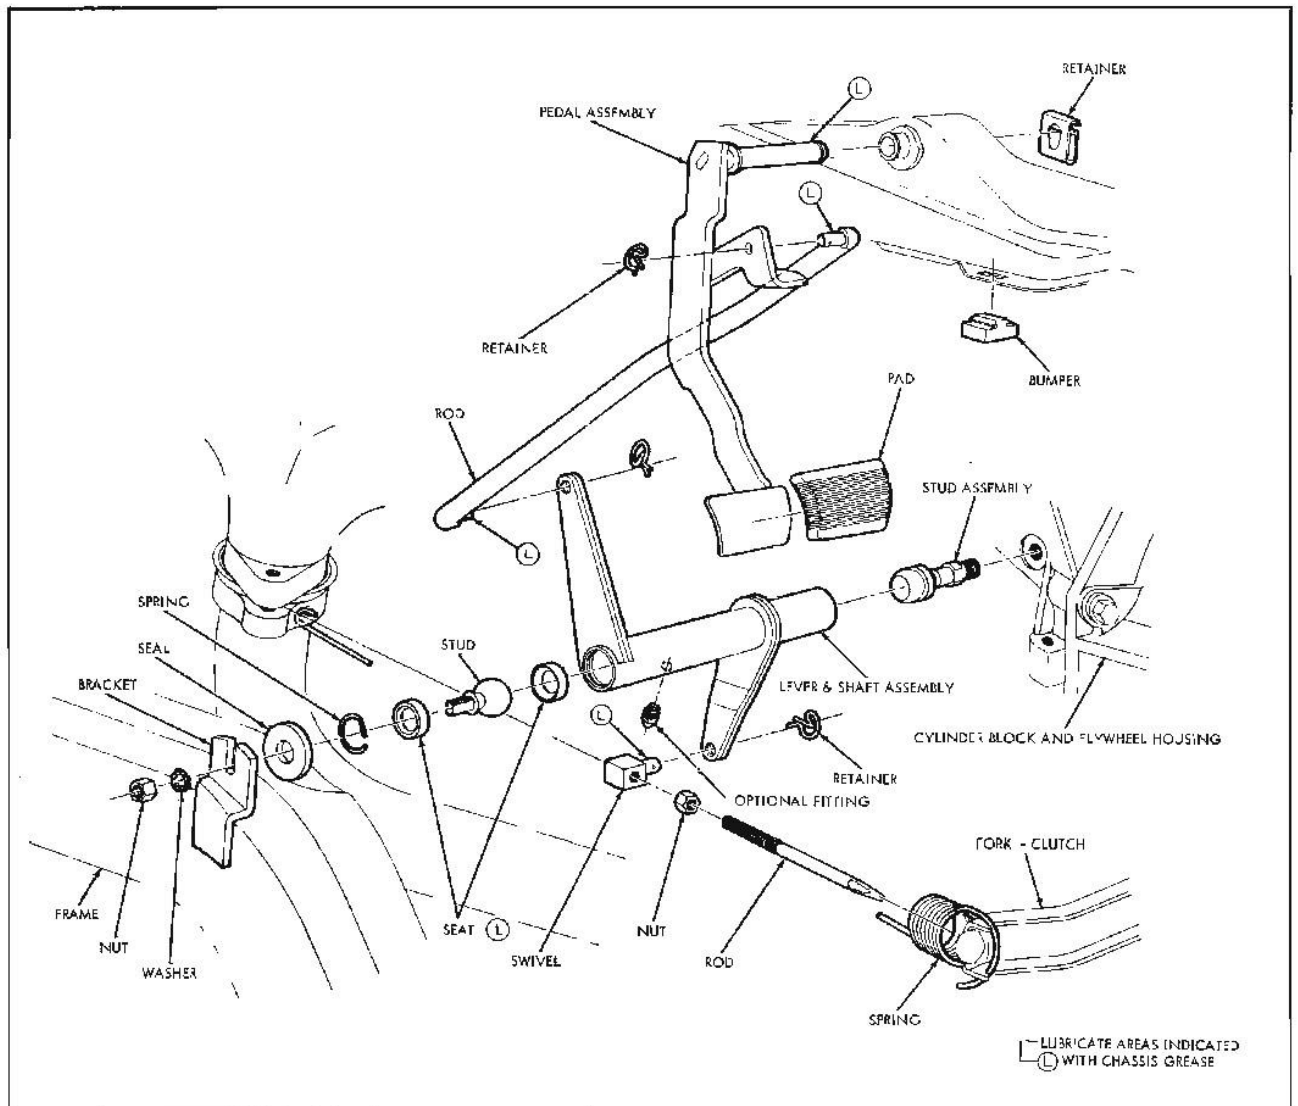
D-3 Clutch Control Linkage - 8 Cyl.
